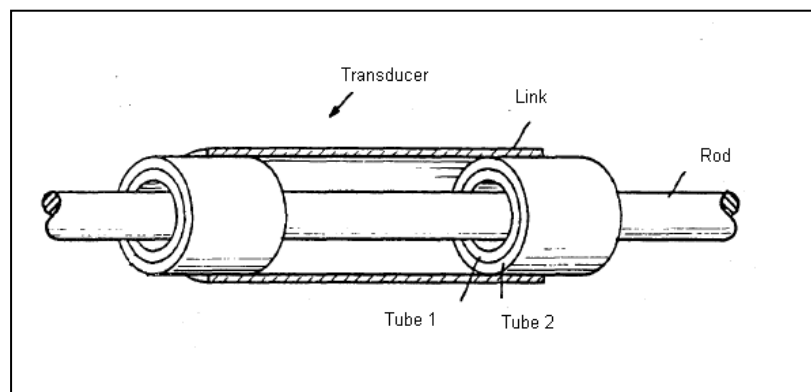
A linear tubular bearing with two squeeze film bearings on each end sitting on a guide-way, rod.
